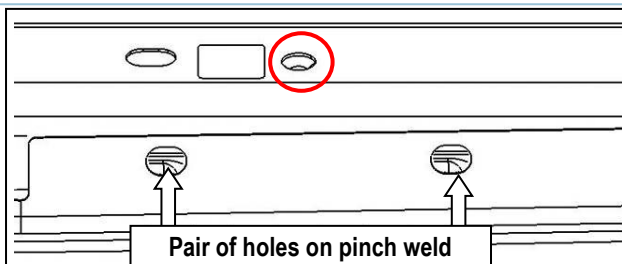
Driver Side Front Mounting Location (Vehicles with factory threaded hole in floor panel)
